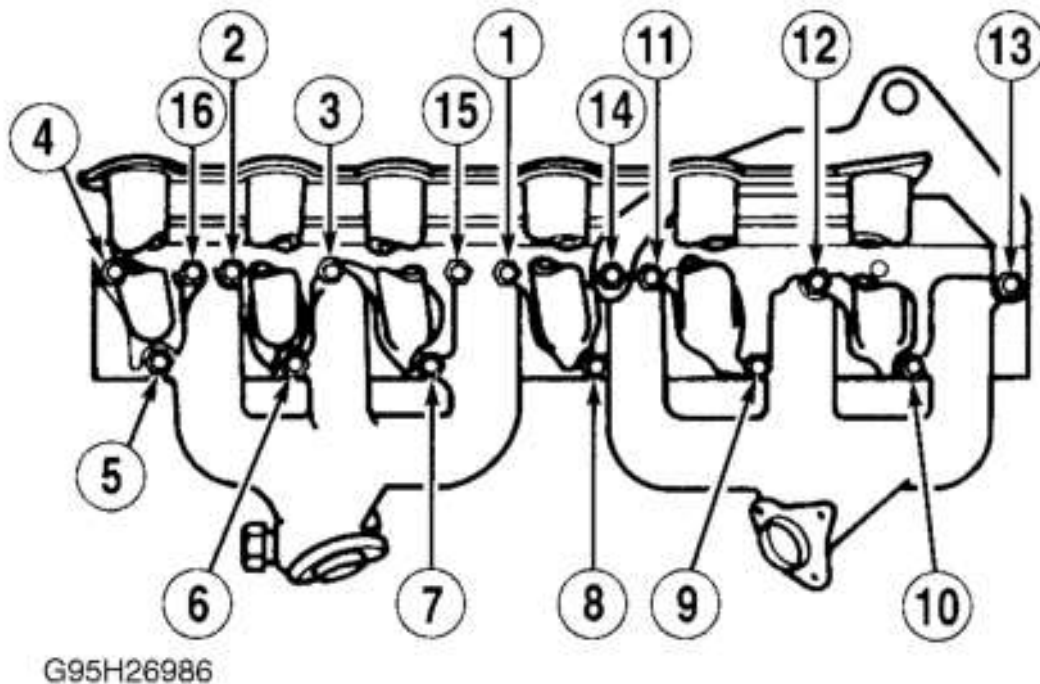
Lower Intake & Exhaust Manifold Tightening Sequence
